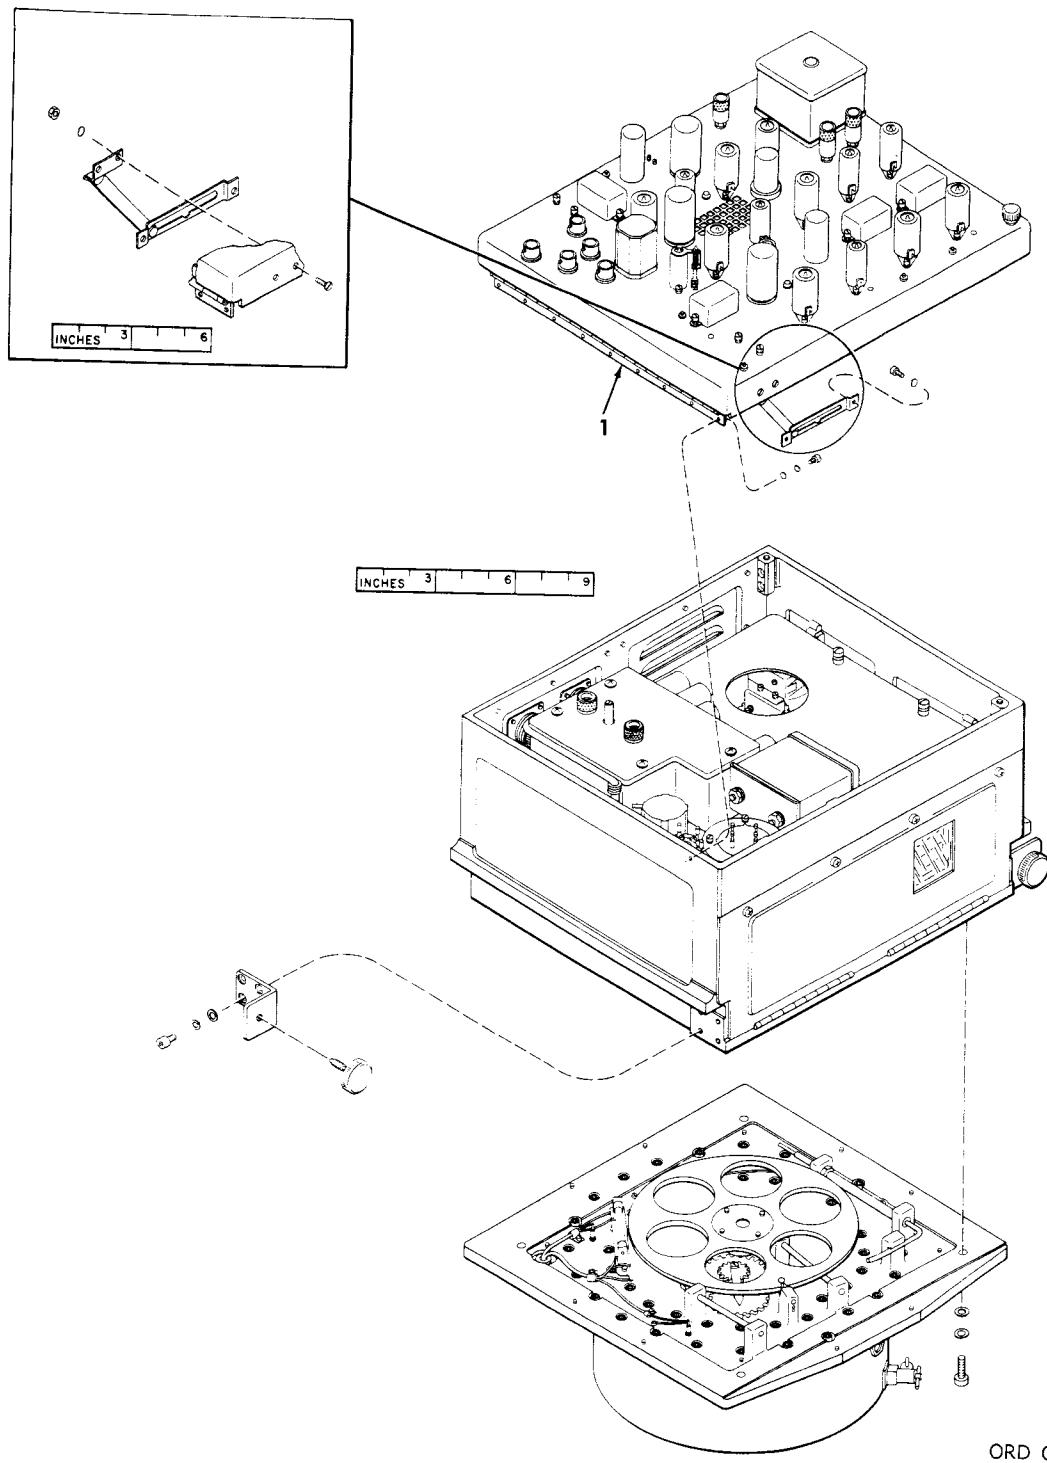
Oscillator subassembly (9141257) - partial exploded view
